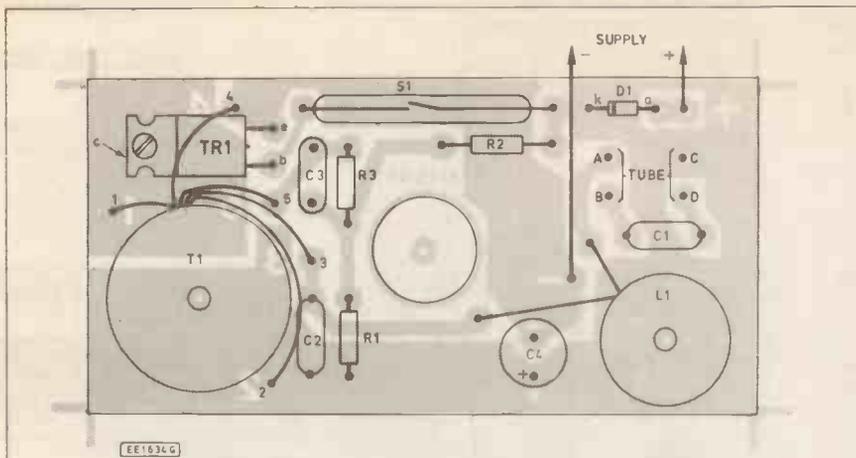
Printed circuit board component layout. The centre of the board is cut out to take the u.v. tube.
